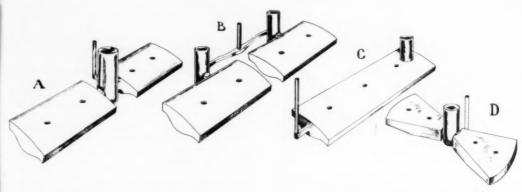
(A) Two castings per flask are fed by central whirl-gate head—yield, 80 per cent. (B) Two side heads are used instead of center head, with consequent lower yield. (C) Ball mill shell liner casting
